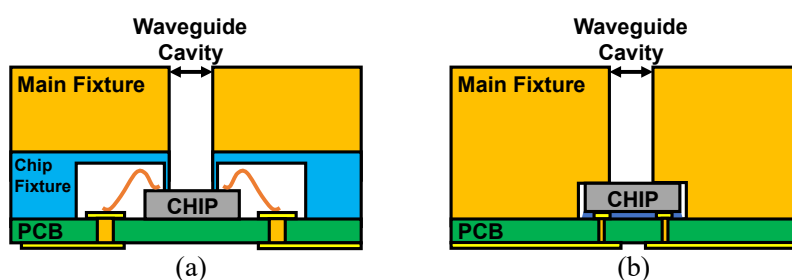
Waveguide fixture assembly for (a) wirebond mounted [7], and (b) flip-chip mounted chip.
